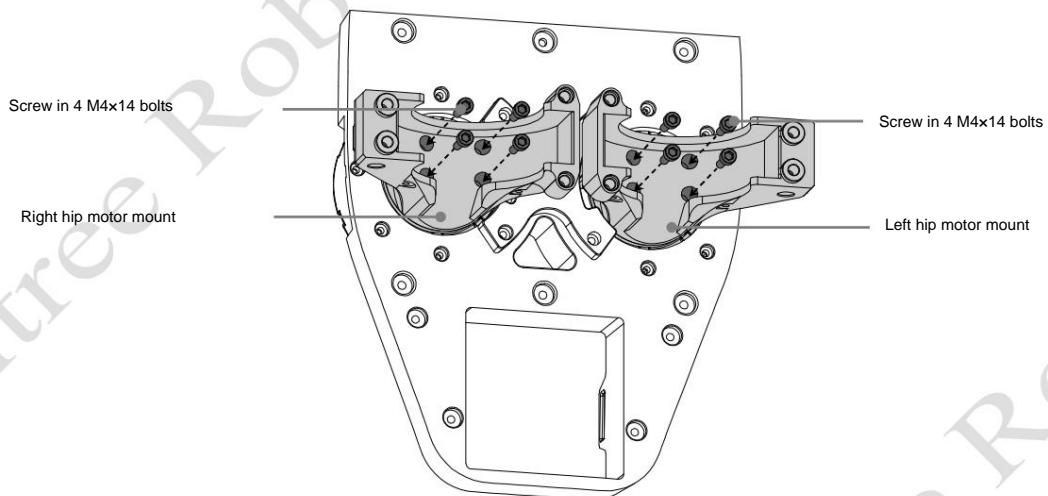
Installation diagram of left and right hip joint motor mounting bases
